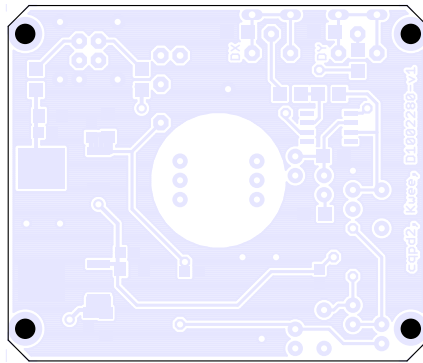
Board bottom view showing drills with 2.7 mm (0.106 in) diameter
